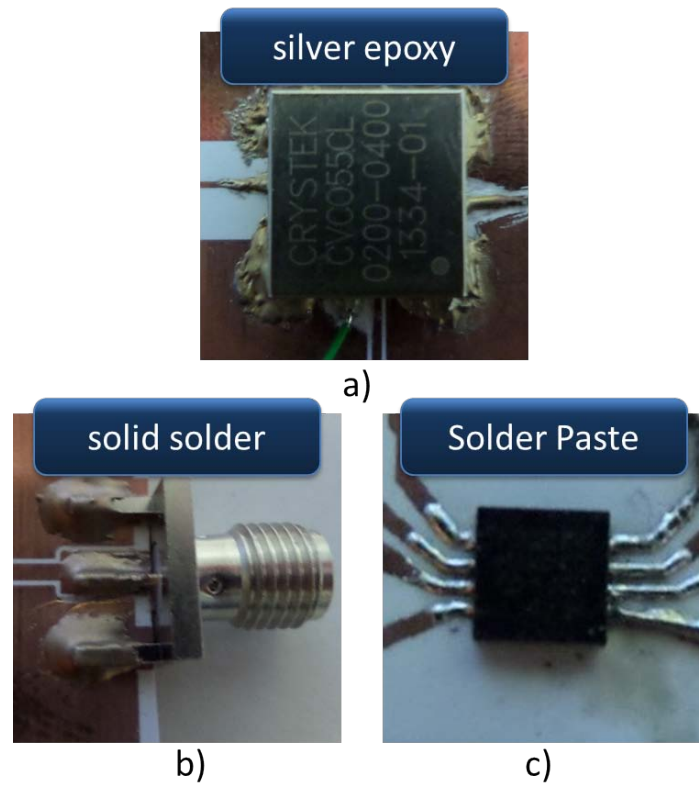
Bonding materials used to attach components to Cu contact pads inkjet printed onto PET a) poxy glue, b) solid solder and c) solder paste.
